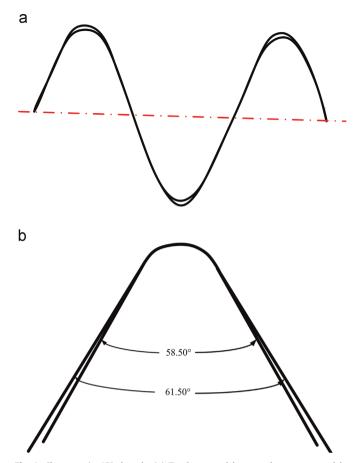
Clearance in API threads. (a) Tooth top and bottom clearance caused by thread profile tolerance. (b) Maximum clearance caused by thread angle tolerance.
